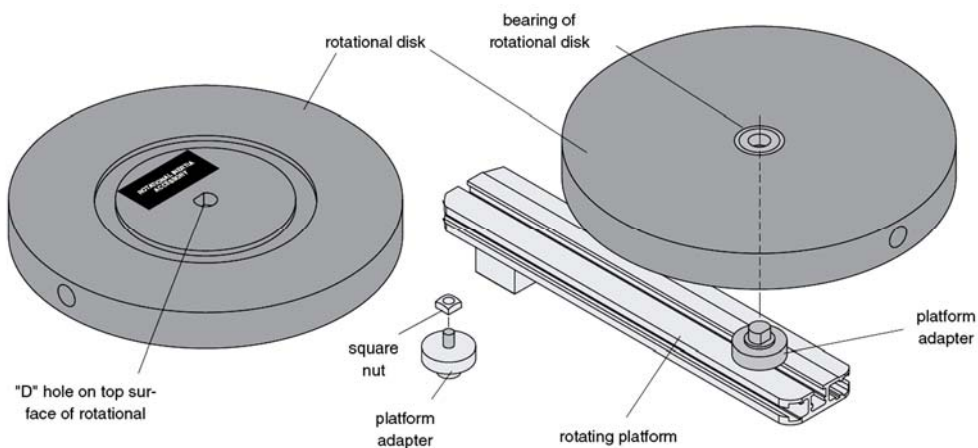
Rotational Inertia Accessory Including Platform Adapter Assembly
